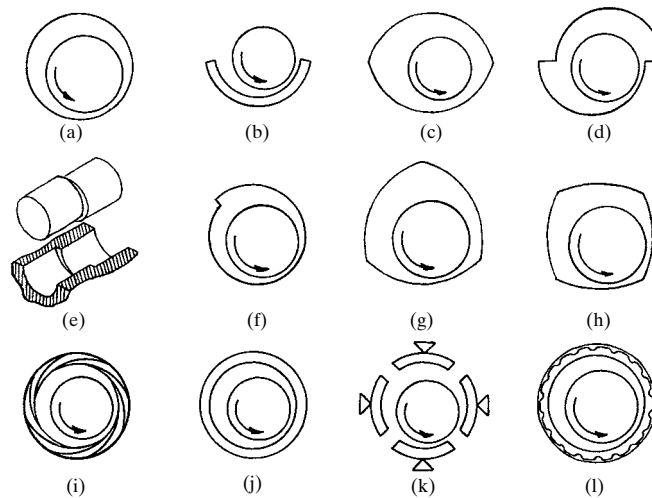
Journal bearing geometries. (a) Full bearing; (b) partial bearing; (c) elliptical, or lemon, bearing; (d) offset bearing; (e) rocking journal bearing; (f) pressure dam bearing; (g) three-lobe bearing; (h) four-lobe bearing; (i) multileaf bearing; (j) floating-ring bearing; (k) tilting- or pivoted-pad bearing; (l) foil bearing.
